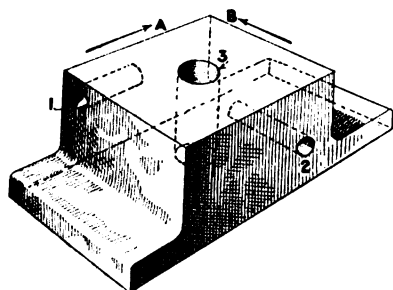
SAMPLE PIECE TO BE MILLED AND DRILLED
